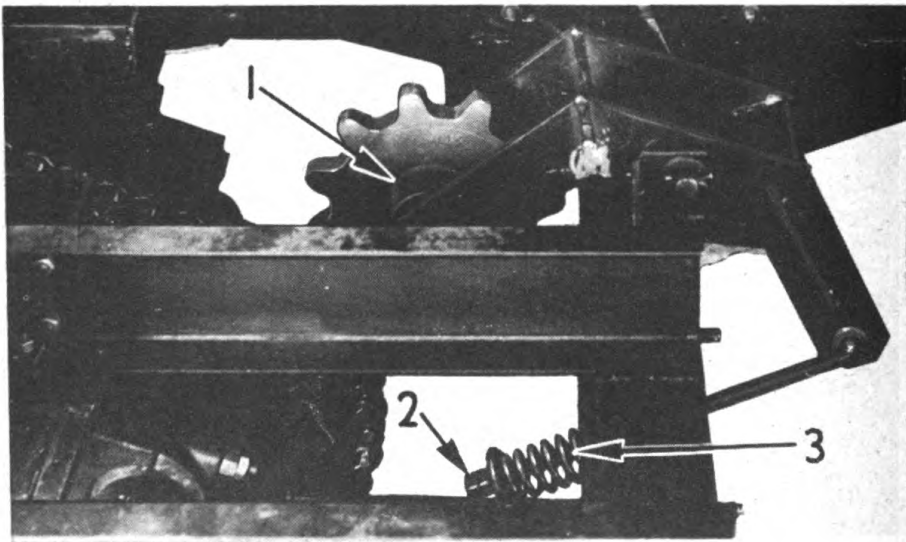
"SPRING LOADED IDLER SPROCKET WHICH MAINTAINS CORRECT ADJUSTMENT OF DRUM DRIVE CHAIN."
